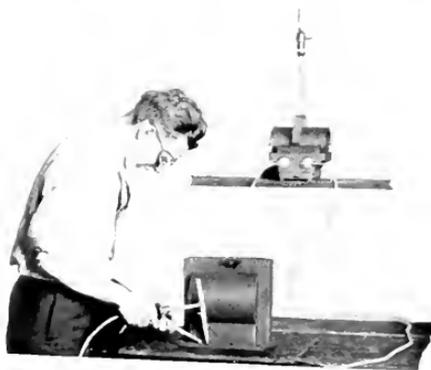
General Electric Pyrotip Soldering an Alloy Flange to Sheet Iron Tank.
